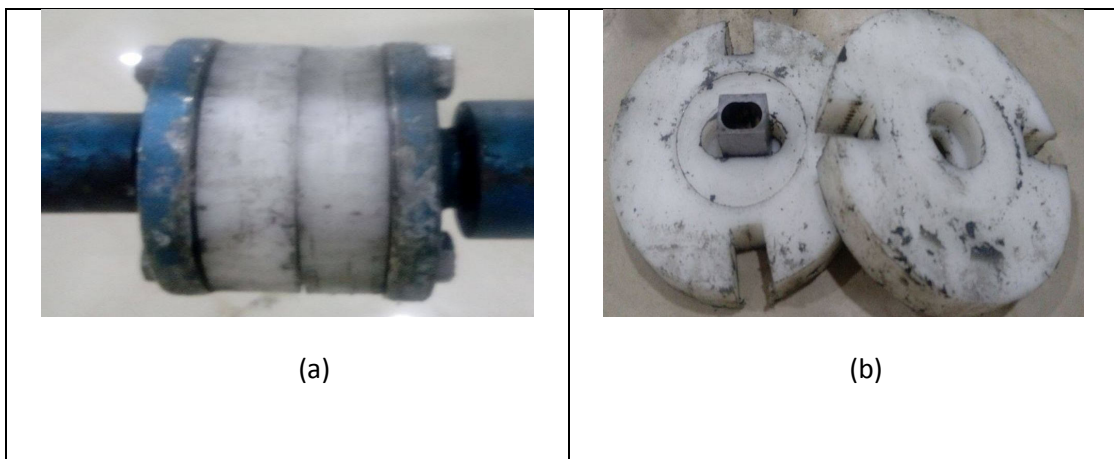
(a) Tooling fixed with stamping die (b) Left and right part of tooling
